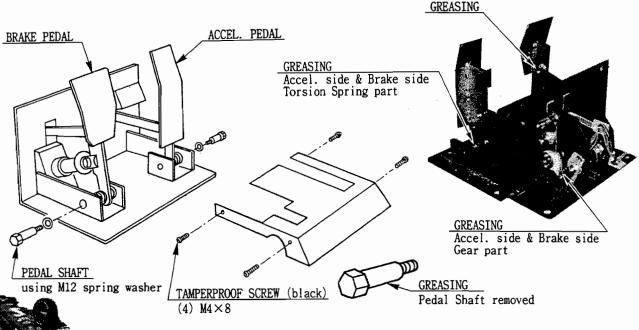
ACCELERATOR AND BRAKE GREASING ACCESS
